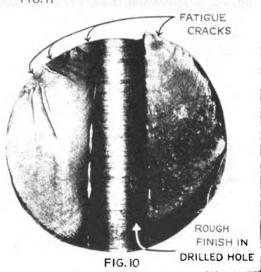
Cross section (enlarged) of the piston rod through section A-B, Fig 7. Note the cracks extending inward from the surface of the taper fit of the piston rod. Fig. 9—Fatigue cracks started from the rough surface on the taper fit of the piston rod. Fig. 10—Fractured end of the piston rod shown in Fig. 9, which failed in service. Fig. 11—Enlarged view of the surface of a piston rod which failed in the taper fit. Note the rough edges of the keyway and the corrosion, which is indicated by the dark areas.
